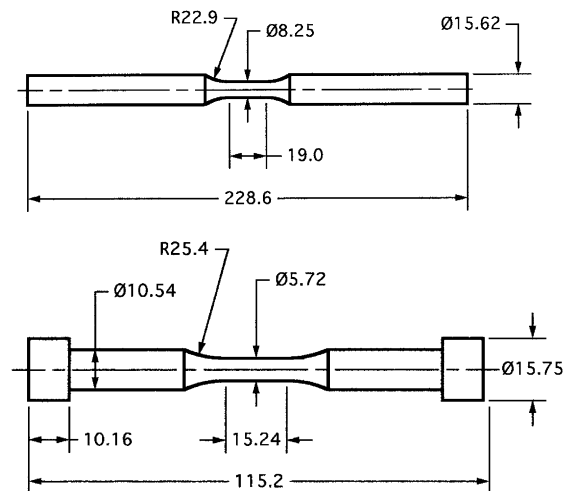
UT fatigue specimens. Dimensions in millimeters.
